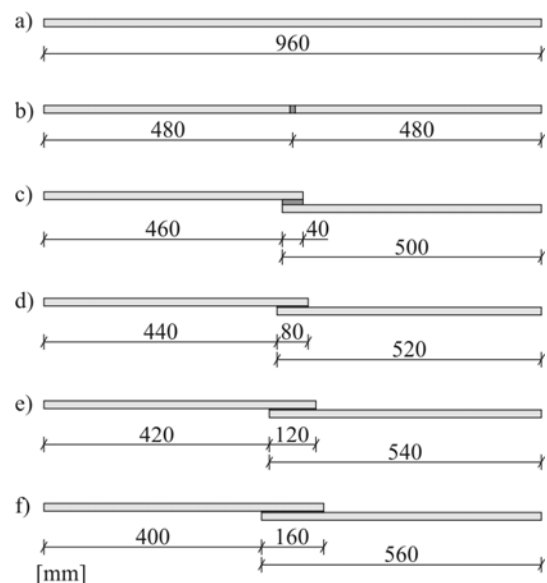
Analysed rod specimens: a) homogeneous rod, b) butt joint, c)-f) single lap joints
